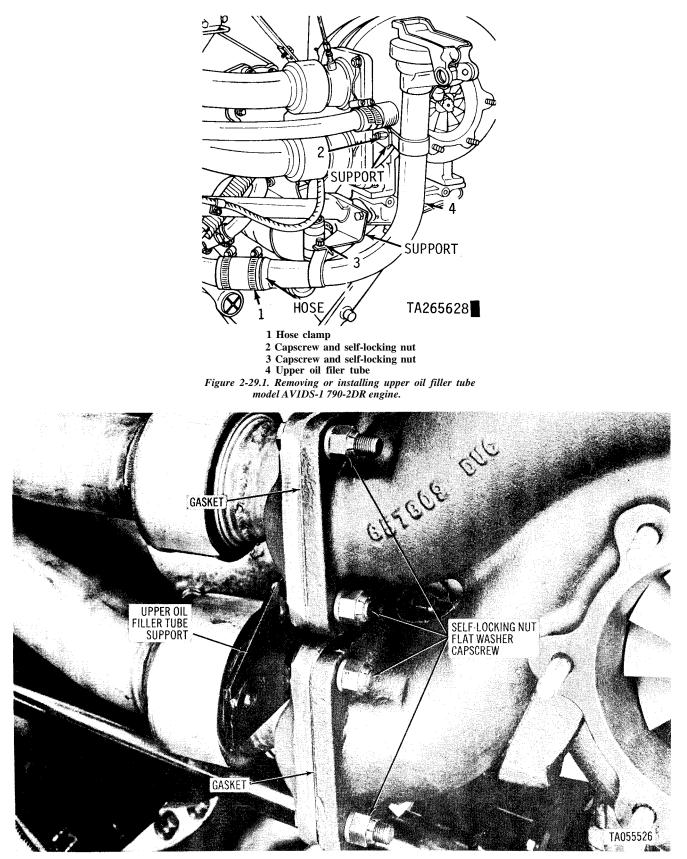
Disconnecting or connection exhaust pipes at turbine housing, model AVDS-1790-2DR engine.
